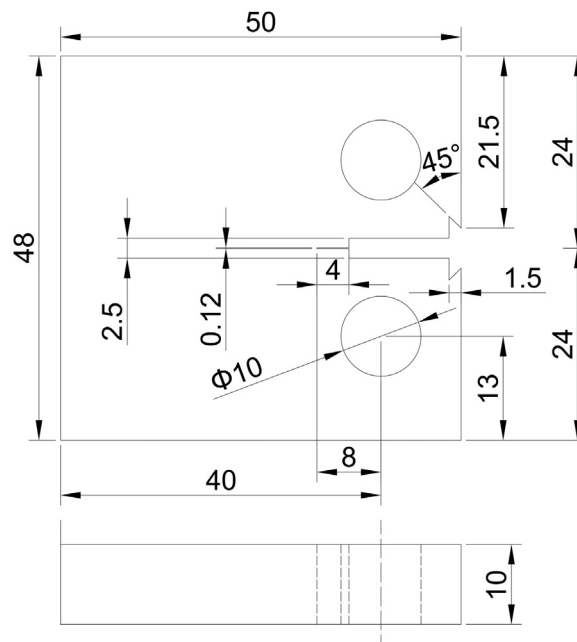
Geometry of the C(T) samples (dimensions in mm).
